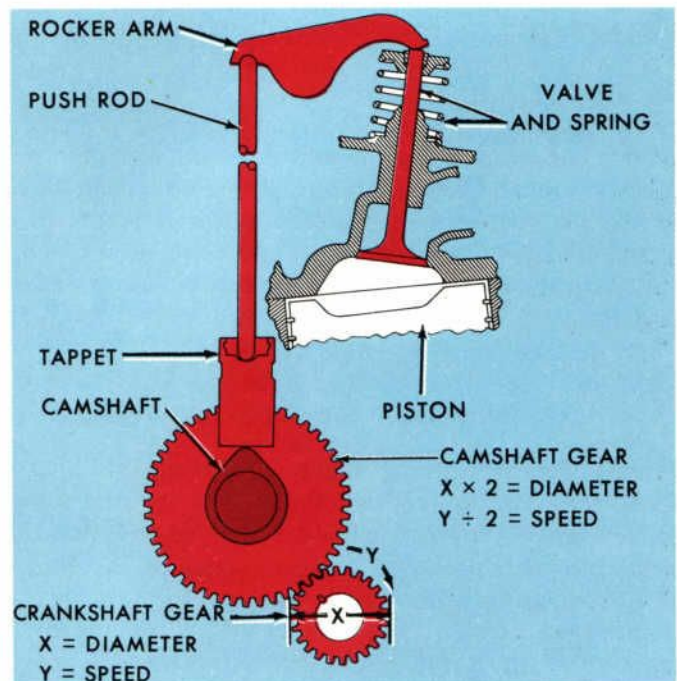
CRANKSHAFT-TO-CAMSHAFT GEAR RELATIONSHIP
